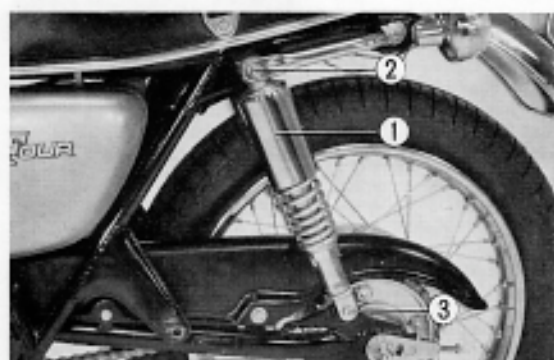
① Rear suspension ② Nut ③ Bolt
